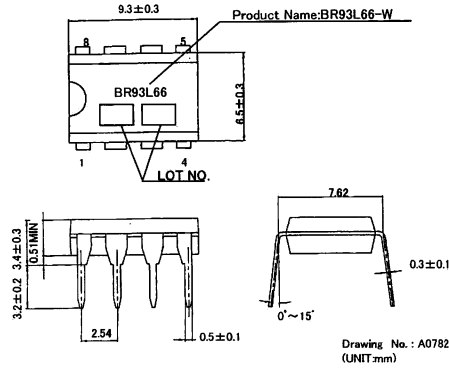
(a) PHYSICAL DIMENSION DIP8 (BR93L66-W)
